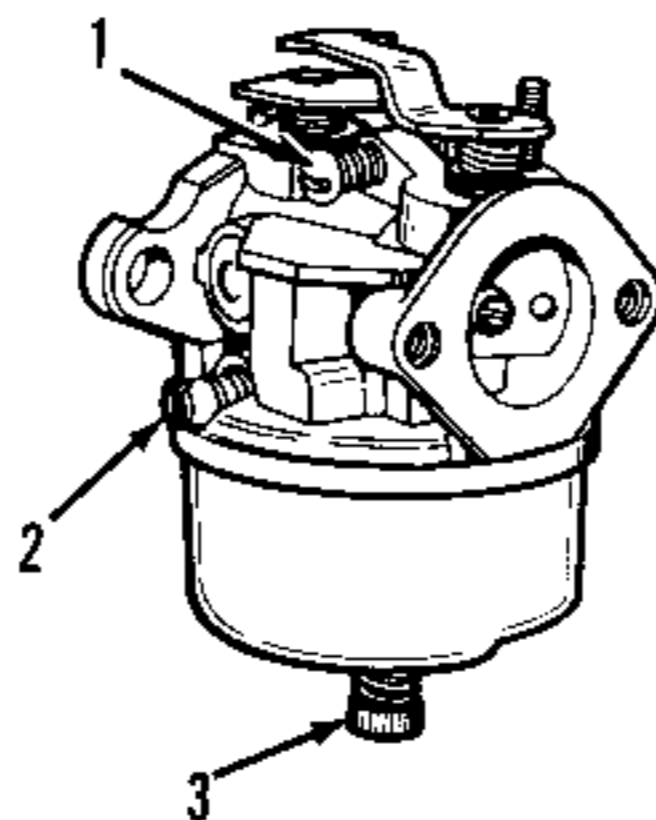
View of carburetor showing idle speed screw (1), idle mixture adjusting screw (2) and high speed fuel mixture adjusting screw (3). Some models may not be equipped with adjustable high speed fuel mixture screw (3).
